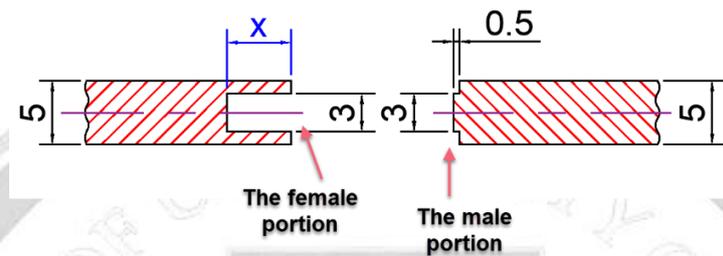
Preparation of the Two Parts of the Welding Specimens (dimensions in mm)
